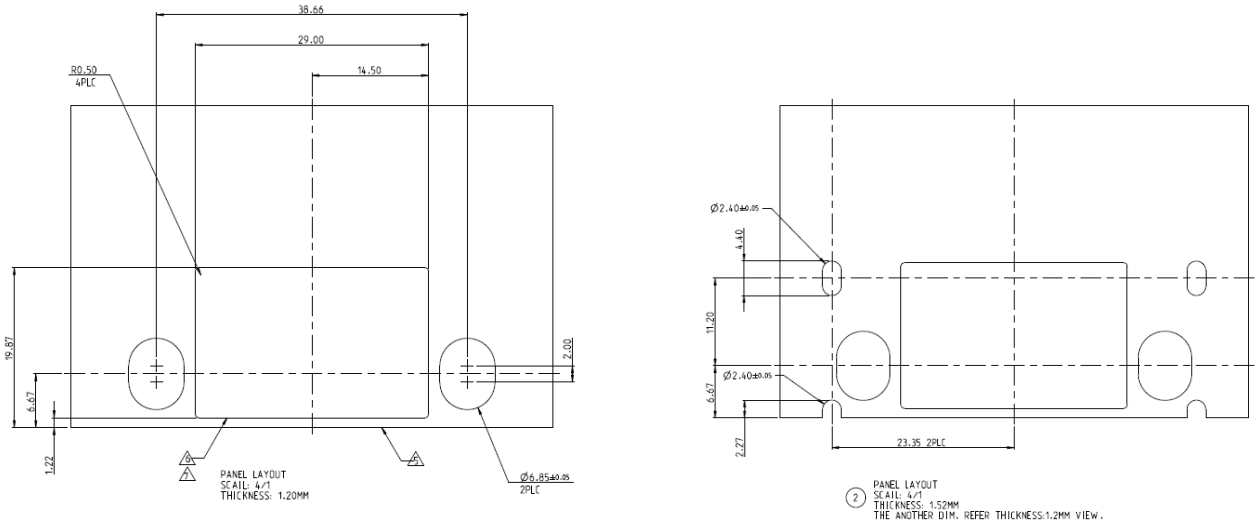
The recommended panel board layout view for Pluggable Bus Bar 50A/80A cable/PCB-mount conn.
